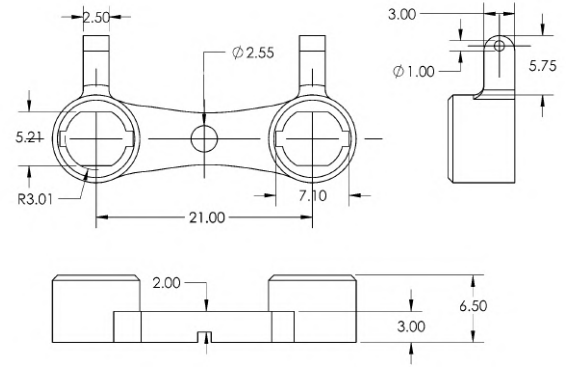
CAD Drawings of the wheel hub showing motor slot and routing guides.
